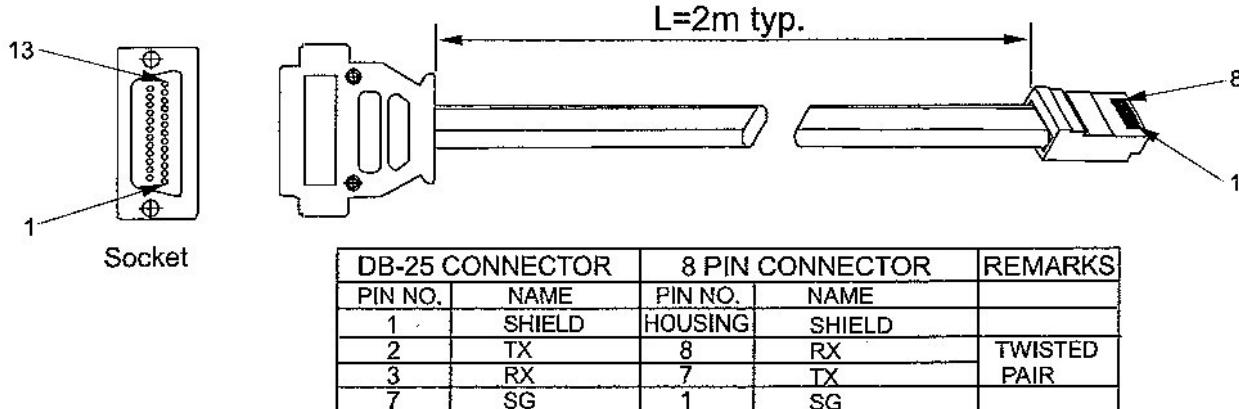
RS-232 Cable with DB25 Connector (P/N:GEN/232-25)
